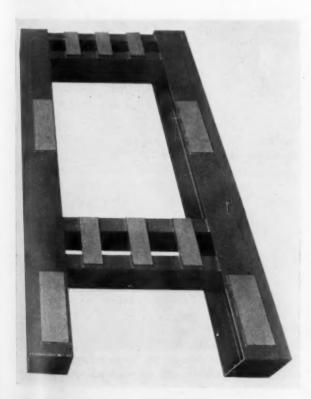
Welded steel base replaces heavier, less dependable cast iron.
